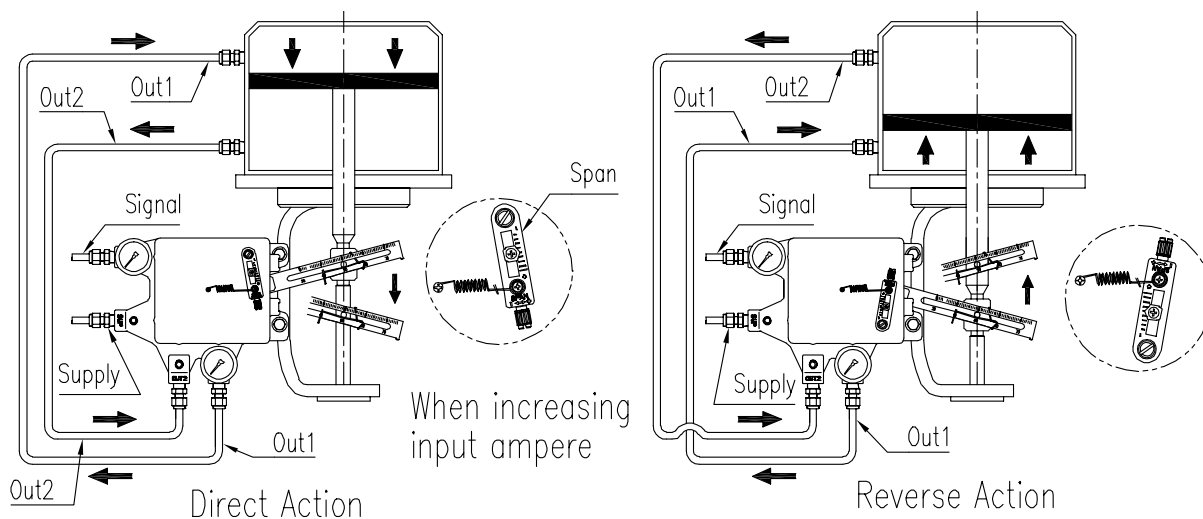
Setting directions of piping and cam for linear double actuator
